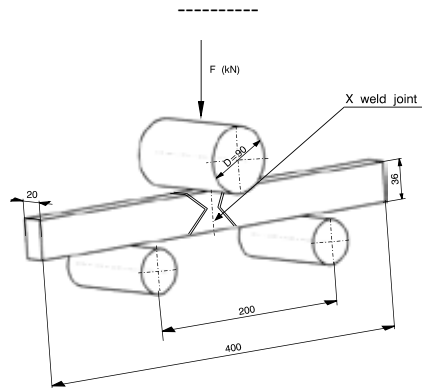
Shape and dimensions of cap flat specimen and a mode of specimen bending
